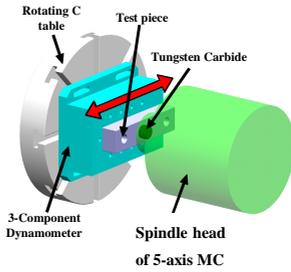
Experiment apparatus of reciprocating sliding friction test.
